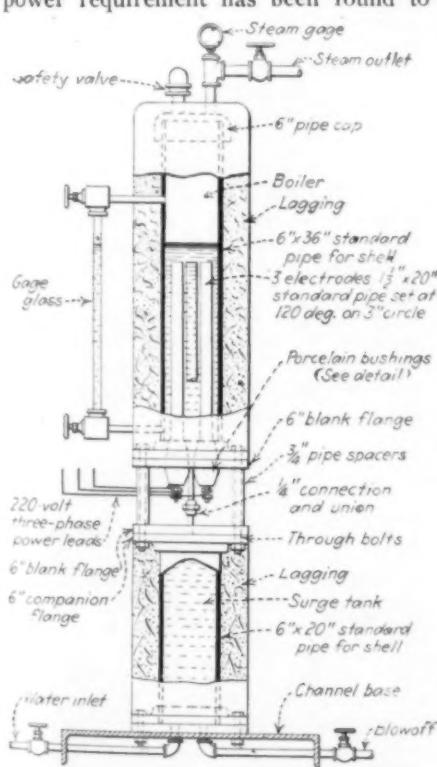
Partial Sectional Elevation of Boiler and Surge Tank
